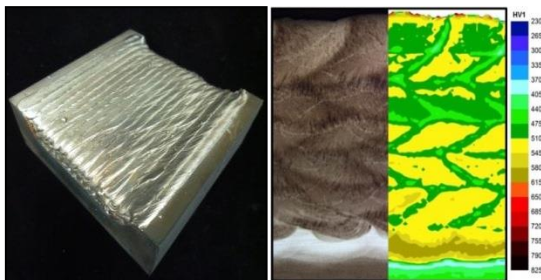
Deposit welded filled test piece (swale)/ Cross-section polish and a hardness allocation of an EB-welded swale (without tempering).
